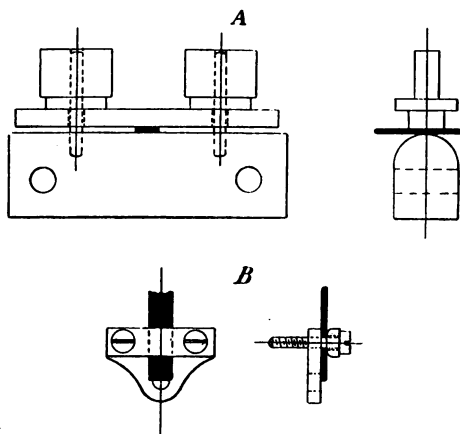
Test-piece Grips for Hysteresis Machine.
